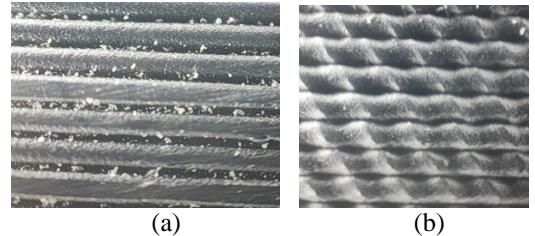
illustrates the top surface of the workpieces. When observed with the naked eye, the workpieces printed without vibration exhibit a smooth and orderly pattern. In contrast, the workpieces printed with vibration display a wave-like surface appearance, reflecting the influence of the applied vibration on the printing process.
